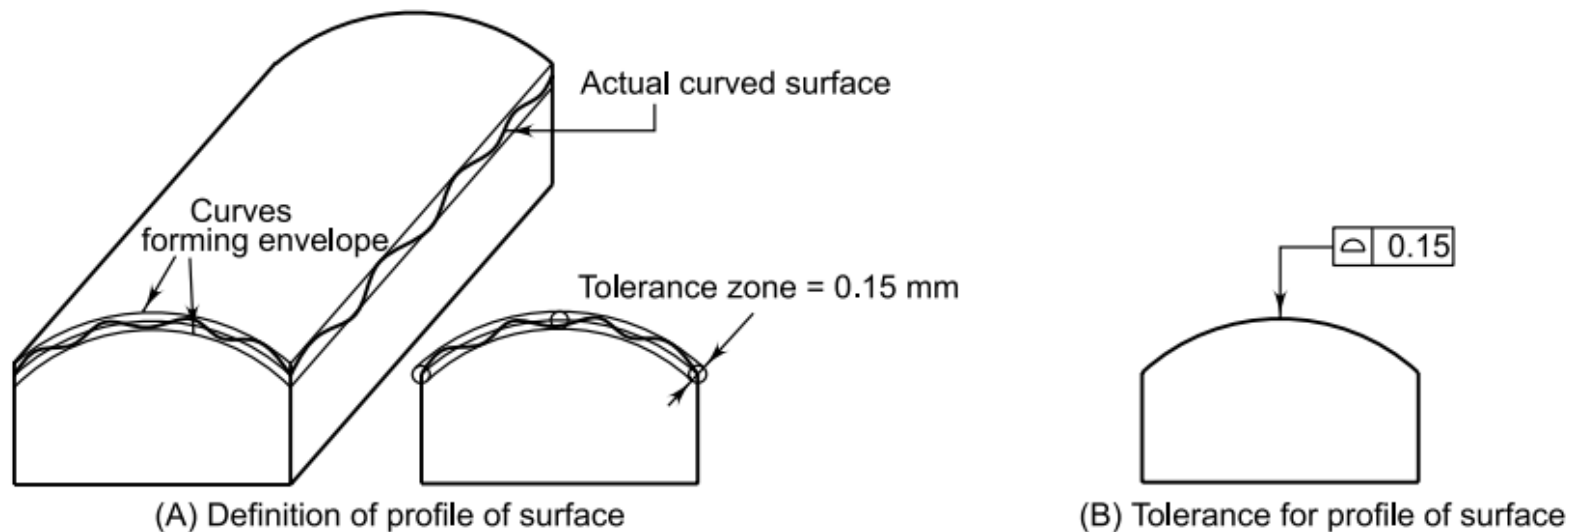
Indicating Profile of a Surface on a Drawing
